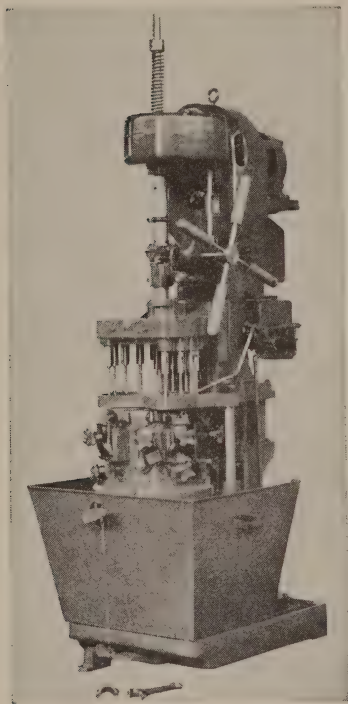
Shows a modern production-drilling setup, with multiple-spindle head and indexing-drill jig, also cutting-lubricant system and chip pan. (Courtesy of The Cincinnati-Bickford Tool Company.)
